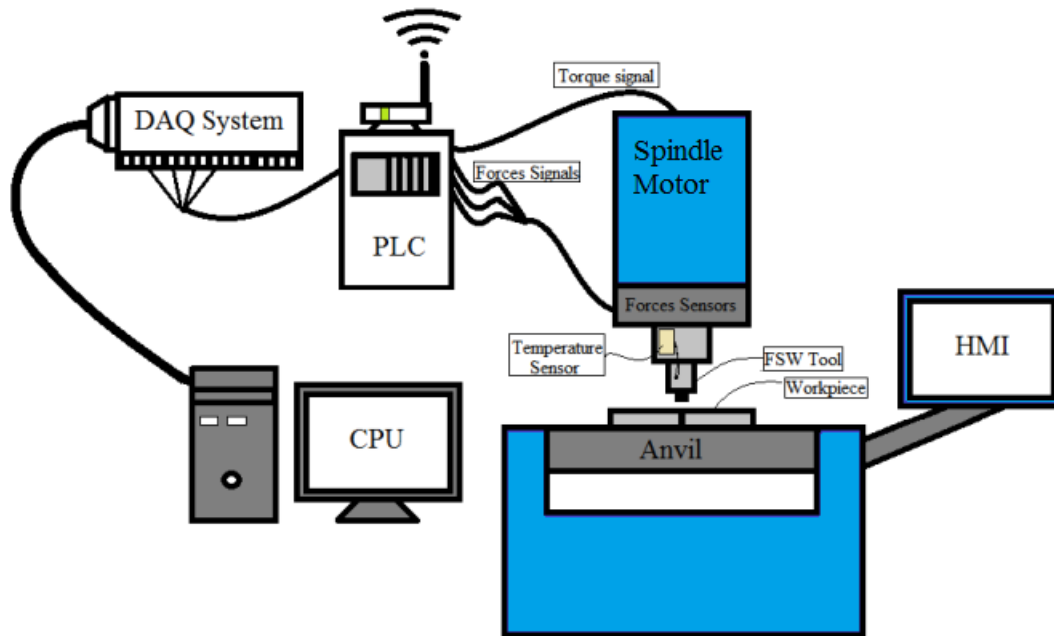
Scheme of the FSW Machine with the DAQ system.
